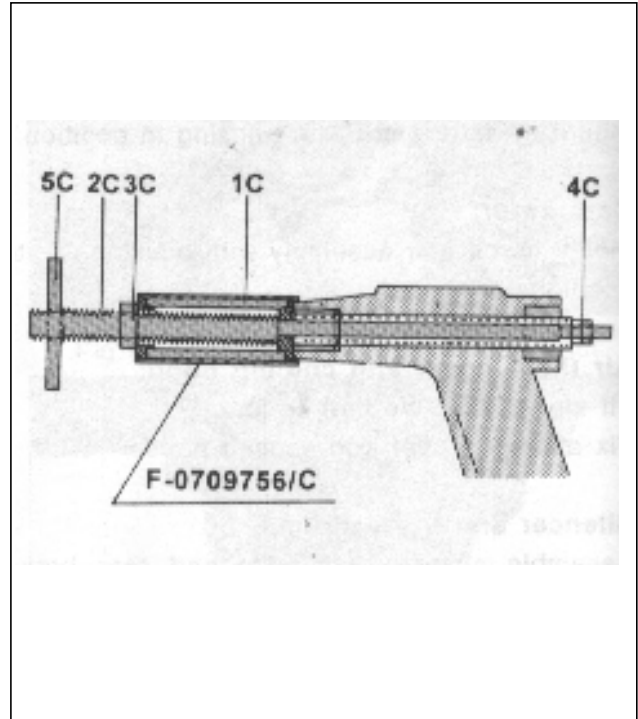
Fixture of extracting & fitting of engine foundation buffers and tube
